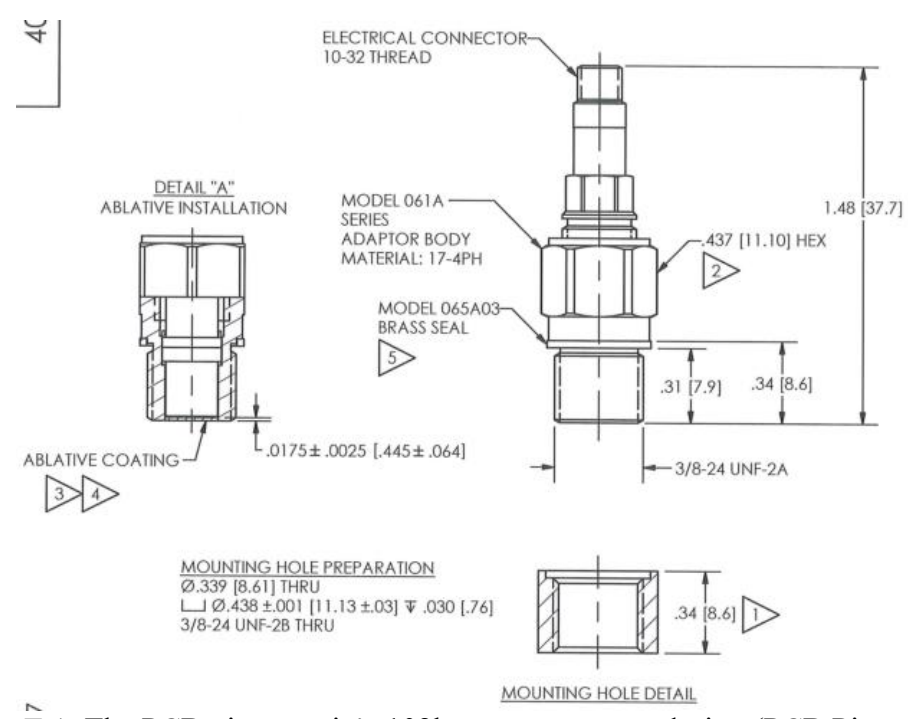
The PCB piezotronic's 102b pressure sensor design (PCB Piezotronics, 2011).
